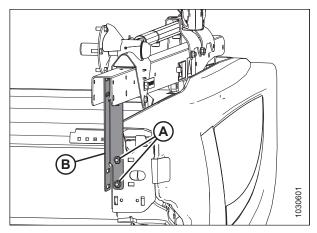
Outboard Reel Arm Supports – D1X Series Header
